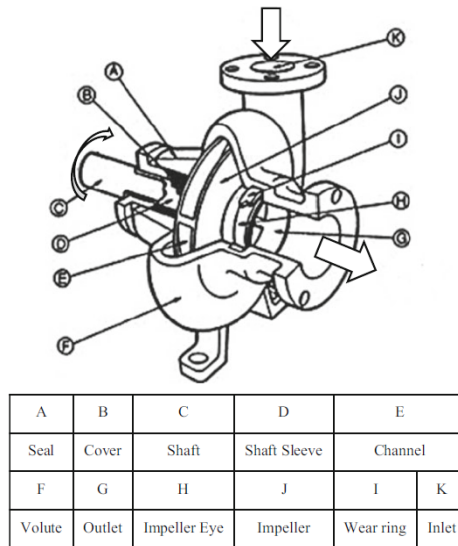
PAT components ([www.processindustryforum.com](http://www.processindustryforum.com))
